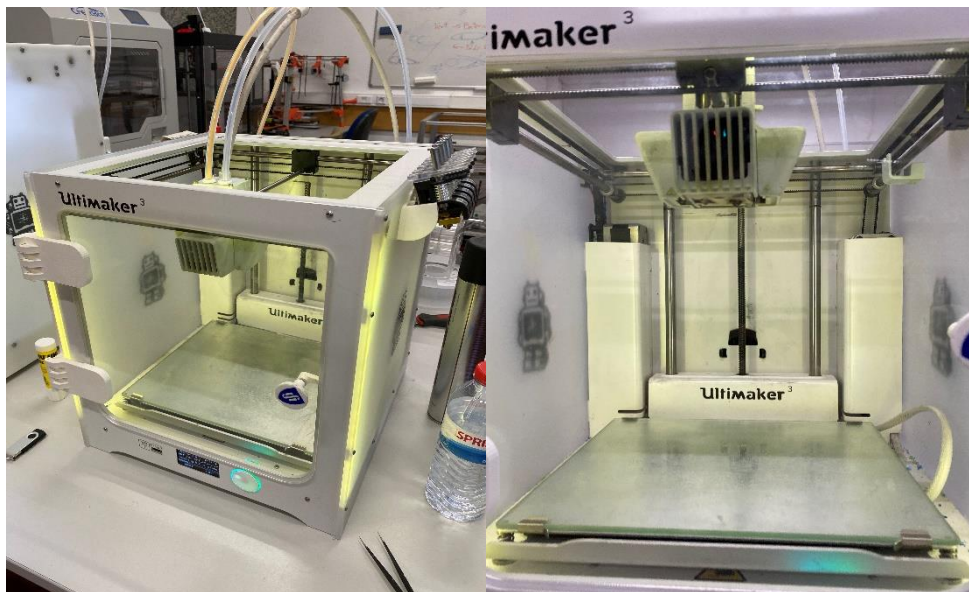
Ultimaker 3 FFF printing machine used for manufacture all specimens
